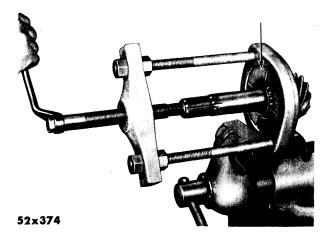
Removing Bearing From Pinion Puller (C-293-C-1)
